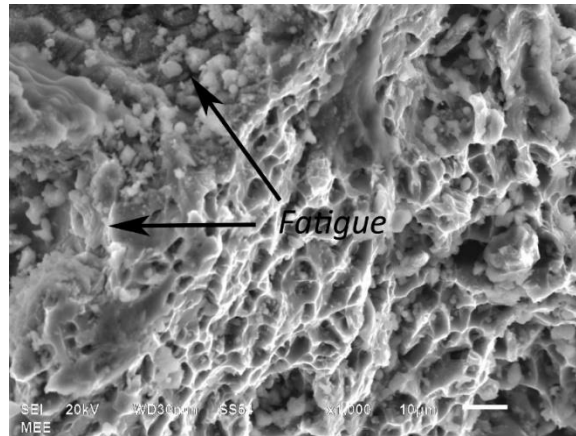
1000X Sample 3, Fatigue, Corrosion, and Ductile Rupture near Weld Root
